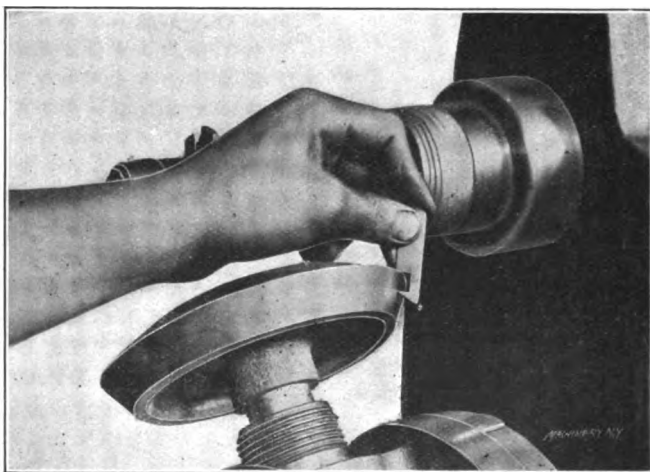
Marking the Depth of Tooth with Depth Gage.
